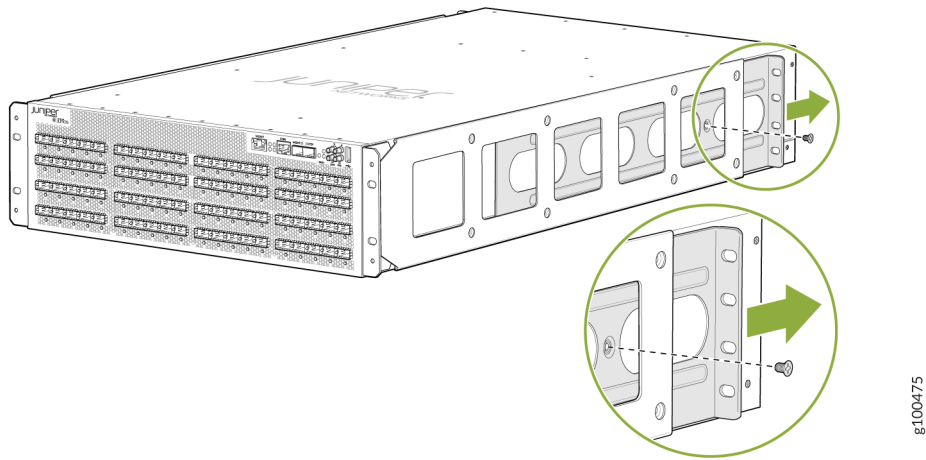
Removing the Slide Rail Screw from PTX10003-80C
